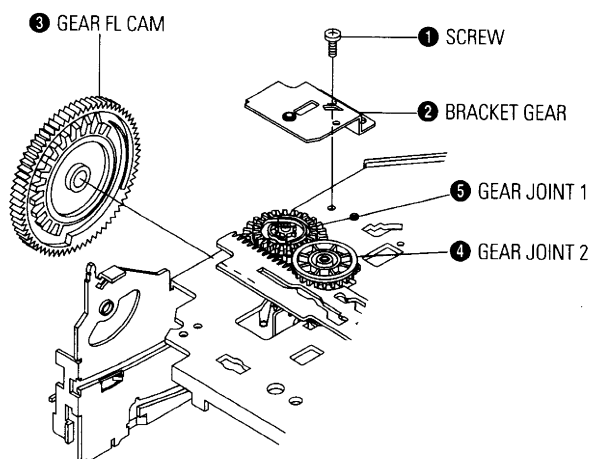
Bracket Gear, Gear FL Cam, Gear Joint 1, 2 Removal
